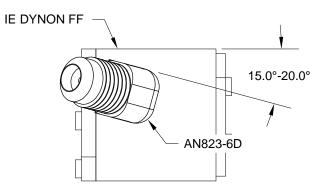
INLET FLUID FITTING CLOCKING REAR VIEW, TRI-GEAR
